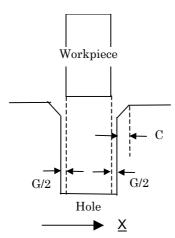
(a) When inserting workpiece in a hole
